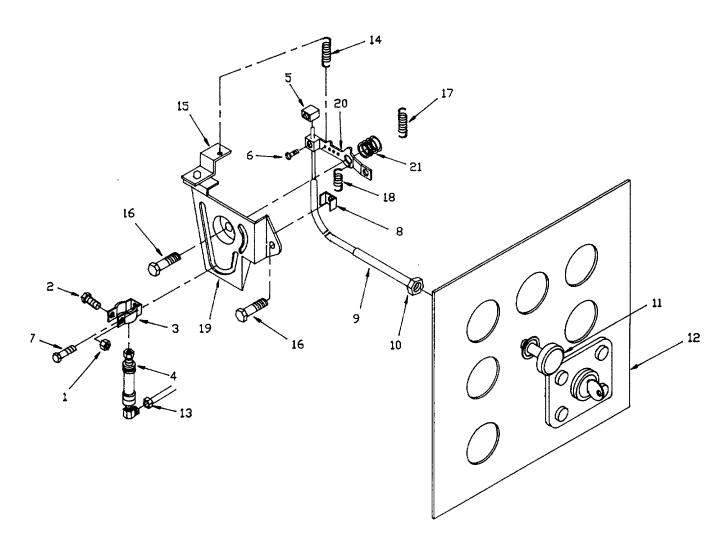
Knob, Cable Assembly, and Speed Control.
